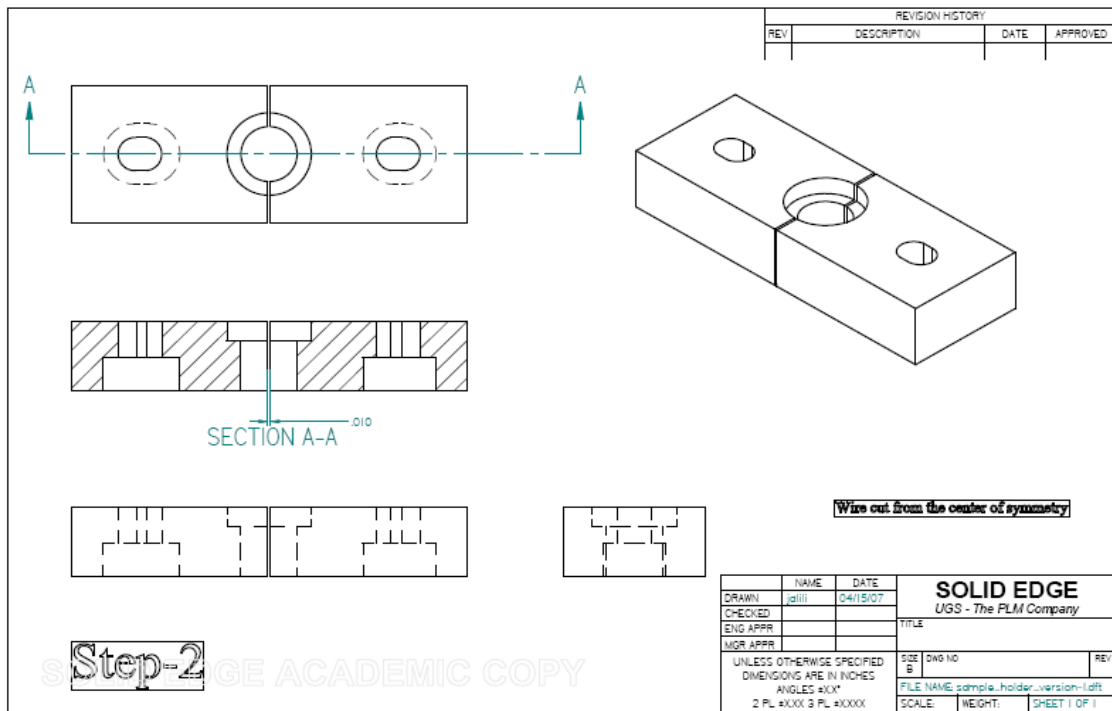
Design of the fixture to hold the tip using a screw which was mounted on the
